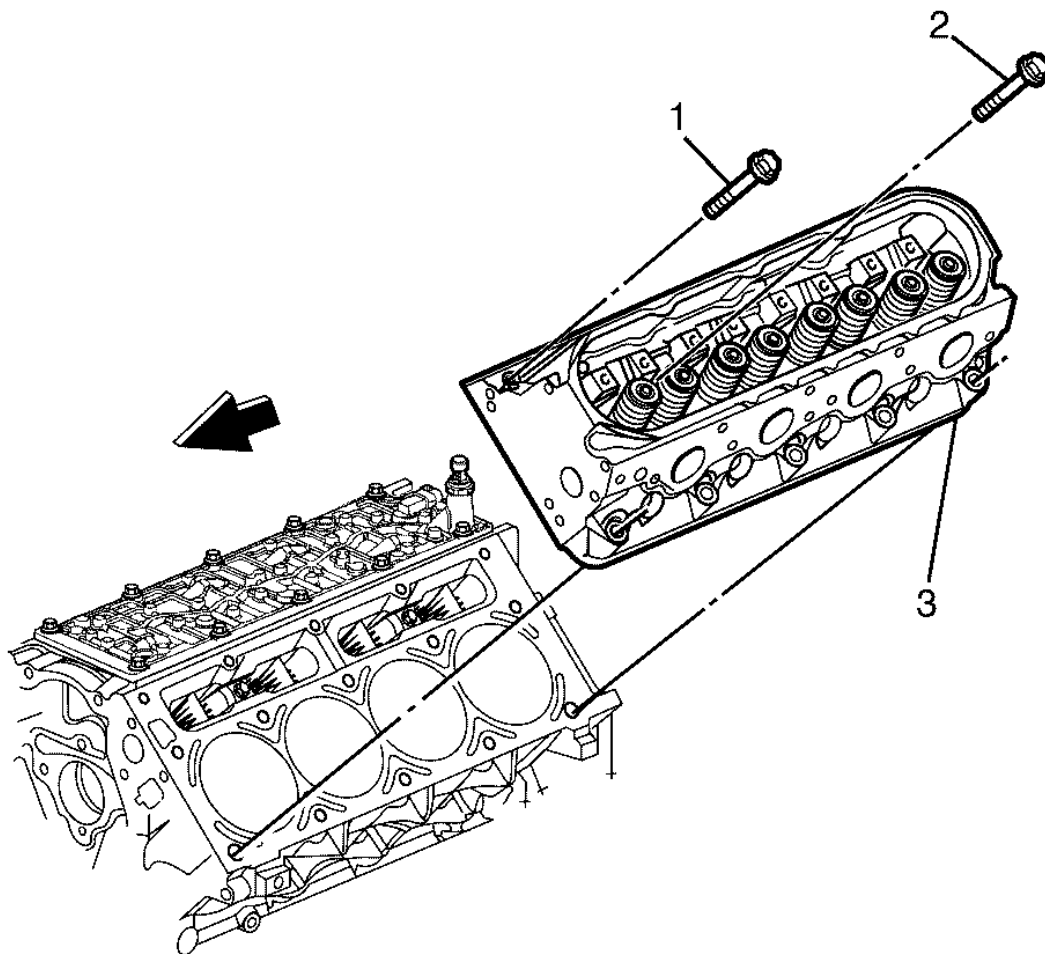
Identifying Cylinder Head & Bolts (Left Side)
